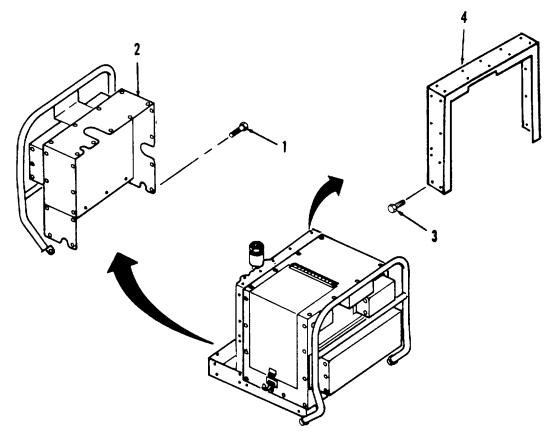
Enclosure Assembly, Outlet Side Removal.
